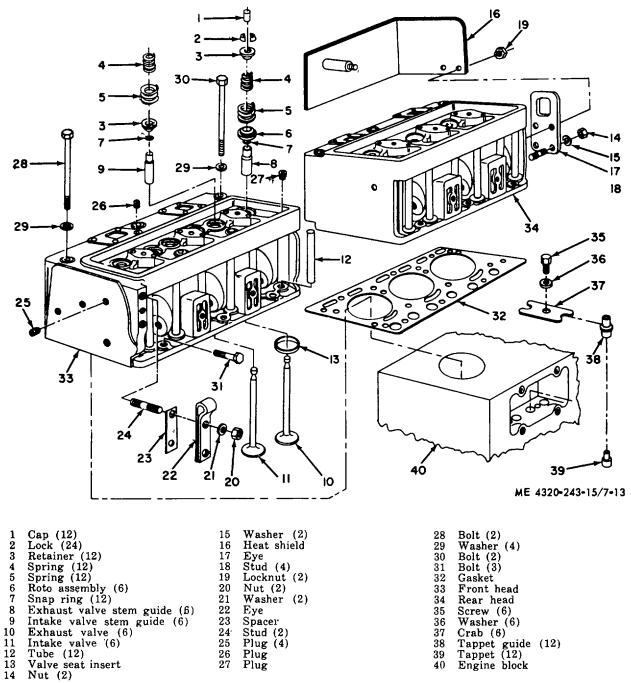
Cylinder head and valve tappets, removal and installation, assembly and disassembly.
